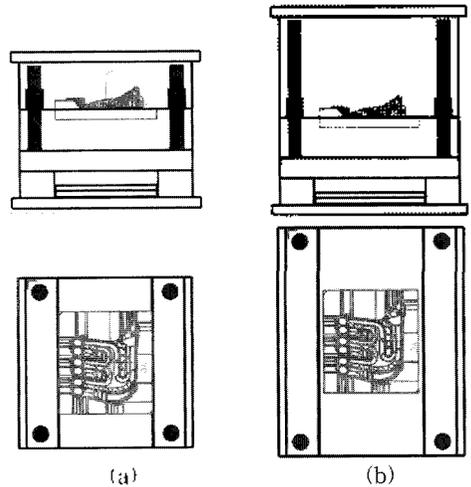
Redesign of standard parts: (a) initial parts, (b) modified parts.
